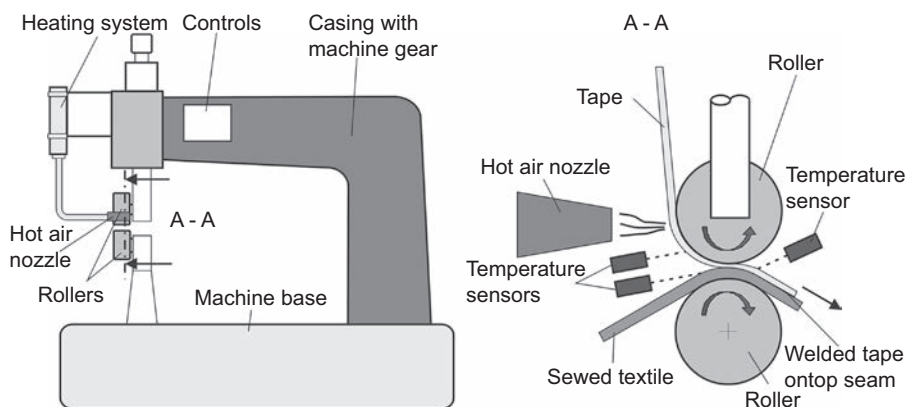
Hot air welding machine (left) and details of sensors around the welding area (right) according to [Ellenberger et al. \(2001\)](#).
